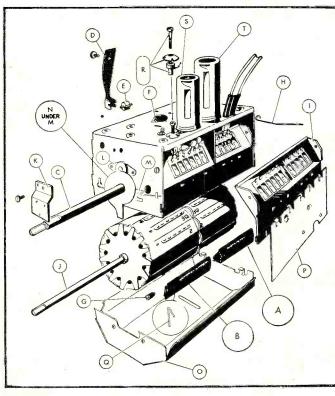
Exploded view of the Standard Coil tuner. Most of the mechanical parts shown labeled are available in the complete parts kit for replacement purposes.
